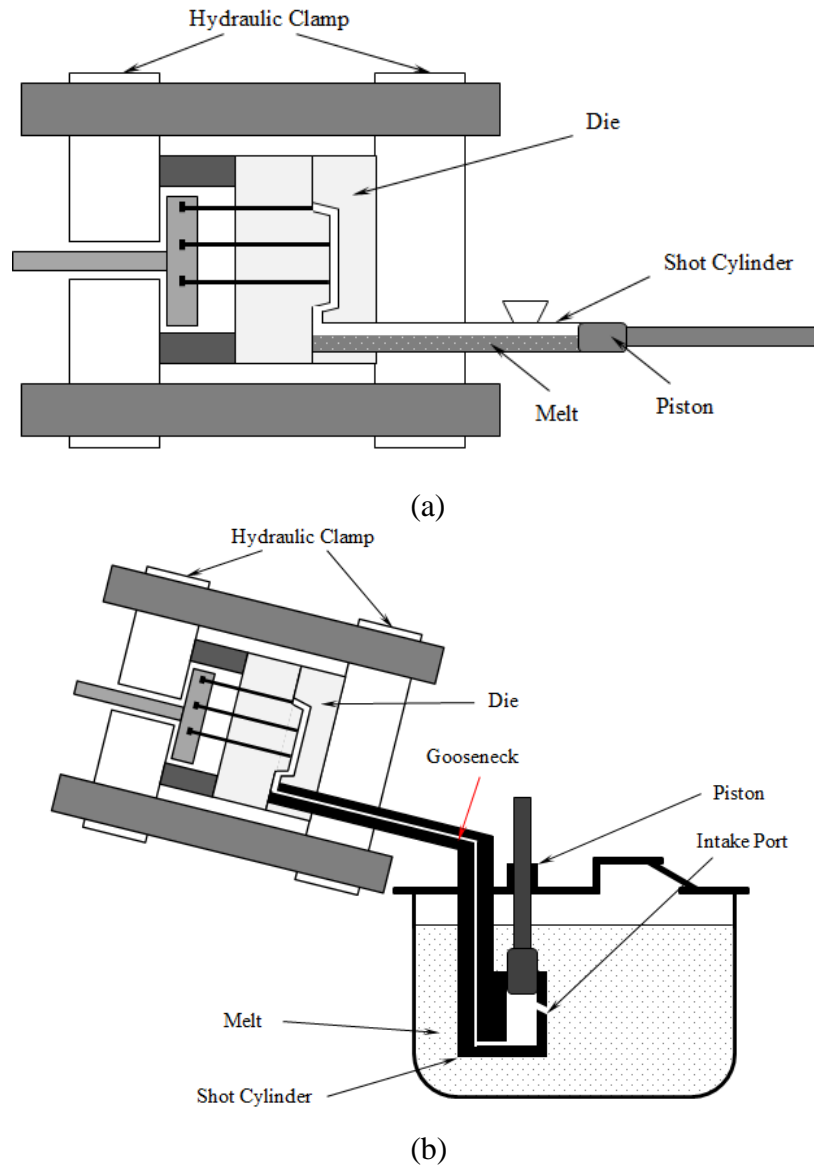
Schematic illustrations of cold chamber HPDC (a), and hot chamber HPDC (b) machines [6].
